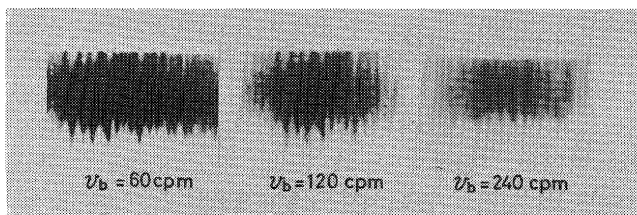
X-ray film photographed from side of weld bead by pin-hole camera (5083 alloy).
